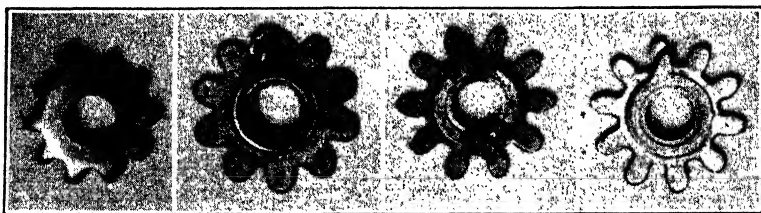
A typical counter gear; pierced and blanked, cold-swaged to shape, trimmed, shaved.
